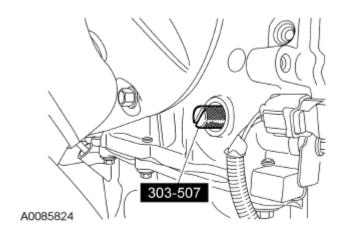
Locating Crankshaft Pulley Hole Bolt (6 mm x 18 mm) Courtesy of FORD MOTOR CO.
